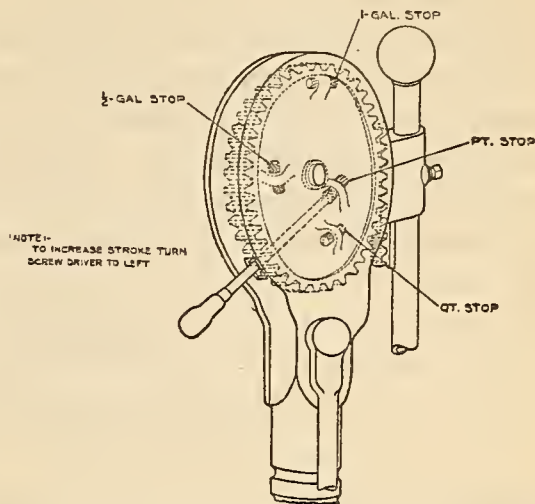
The adjustments of this type are usually secured by sealing shut the case inclosing the gear. If this can not be done, or if there are slots in the gear case through which the screws may be reached from the outside, holes should be drilled through the set screws in the interior of the case and the usual seal wires passed through these holes to prevent the screws from being moved
